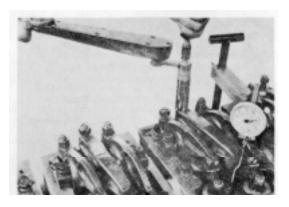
N-67. Tighten the Locknut with a ST-669 Adapter
